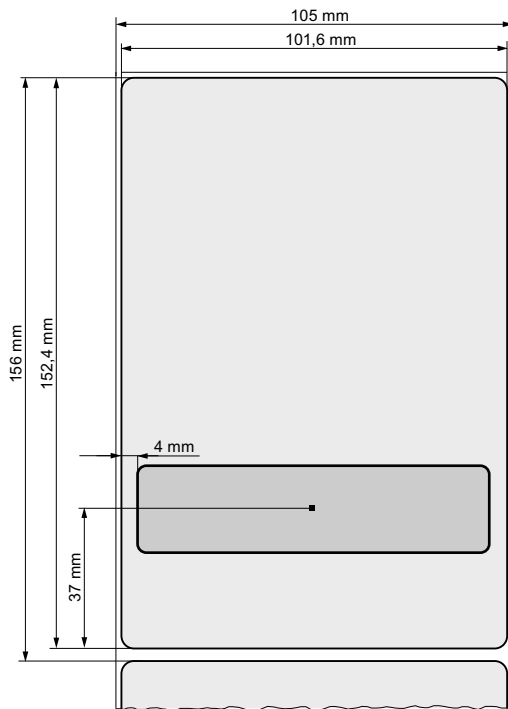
SIMATIC RF630L 6GT2810-2AB00 dimension drawing
